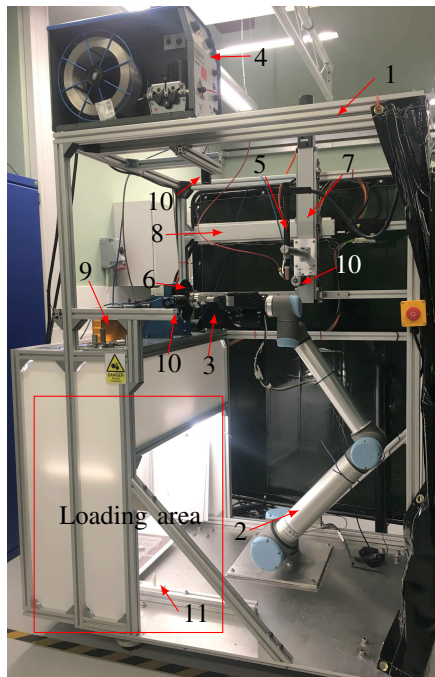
SERFOW cell: 1) aluminum structure, 2) robotic arm, 3) smart grasper, 4) wire feeder, 5) torch, 6) turn-table, 7) Z axis linear motor drive, 8) X axis linear motor drive, 9) Phobos camera, 10) PosCam cameras, 11) re-orientation jig.
